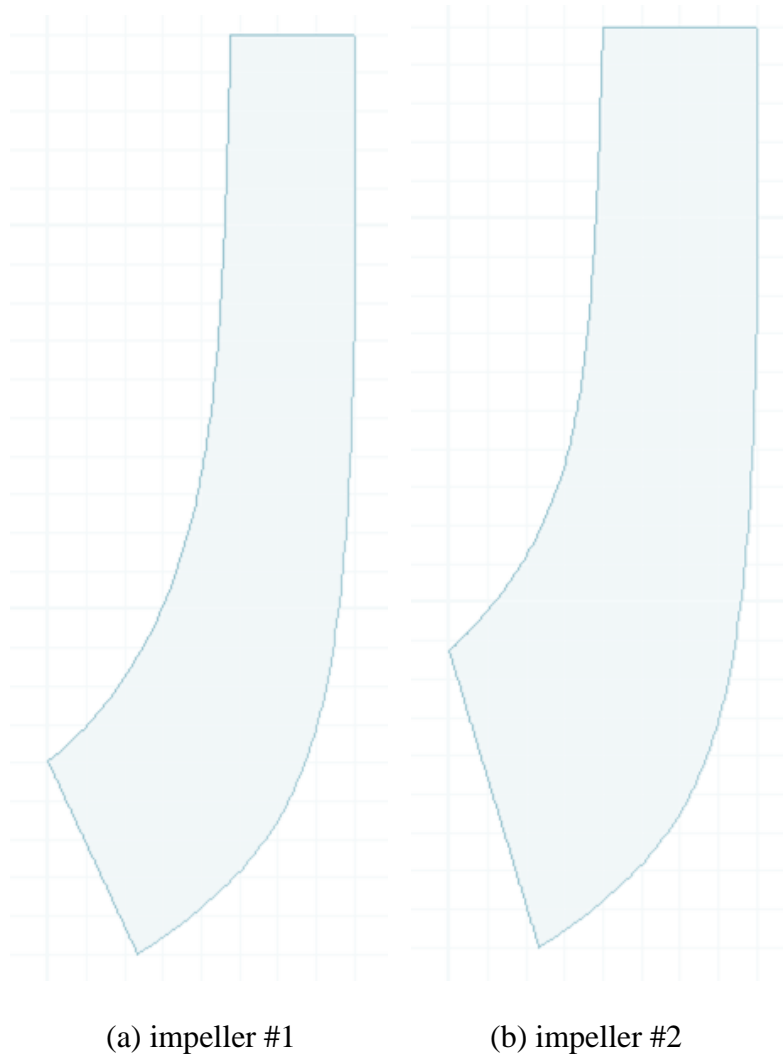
1 Meridional shape of two tested impellers (Impeller #1, Impeller #2)
